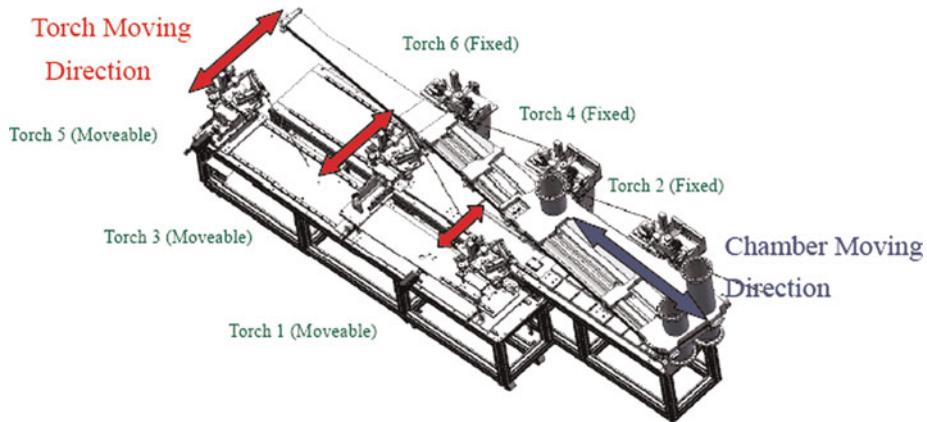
Engineering drawing for auto-welding system.
